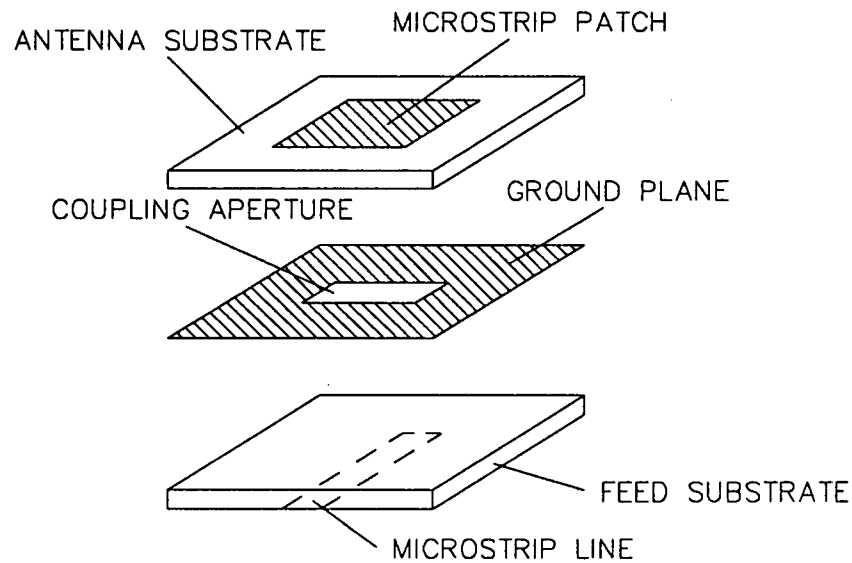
EXPLODED VIEW OF A MICROSTRIP PATCH
